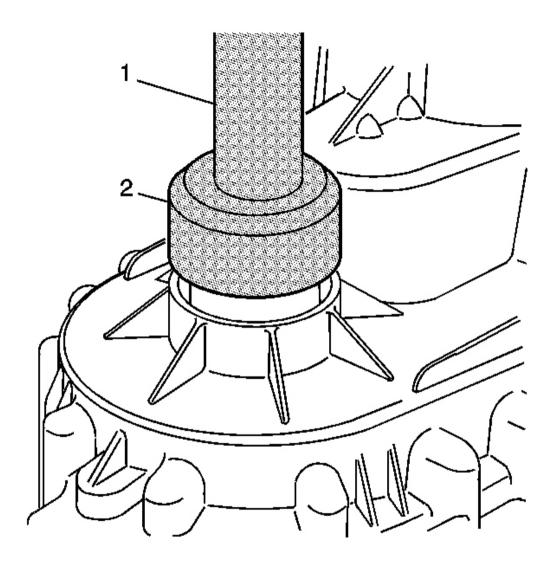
Installing Front Output Shaft Seal With J 43484 & J 8092 Courtesy of GENERAL MOTORS CORP.
